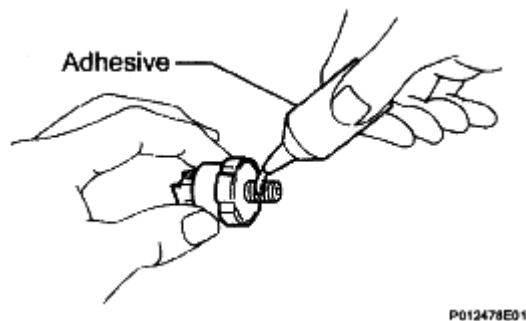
Applying Adhesive On Threads Of Oil Pressure Switch
